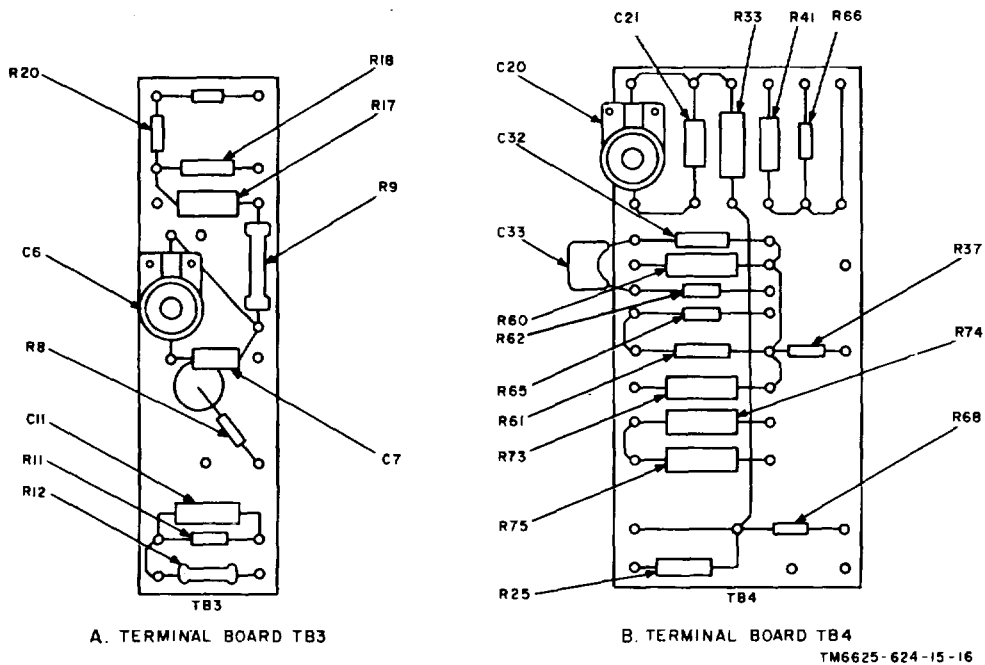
Terminal boards TB-3 and TB-4, component locations.
